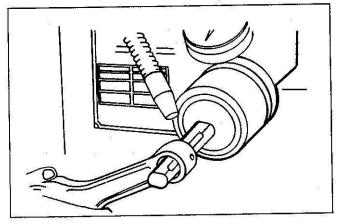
Honing the Connecting Rod Piston Pin Bushing
